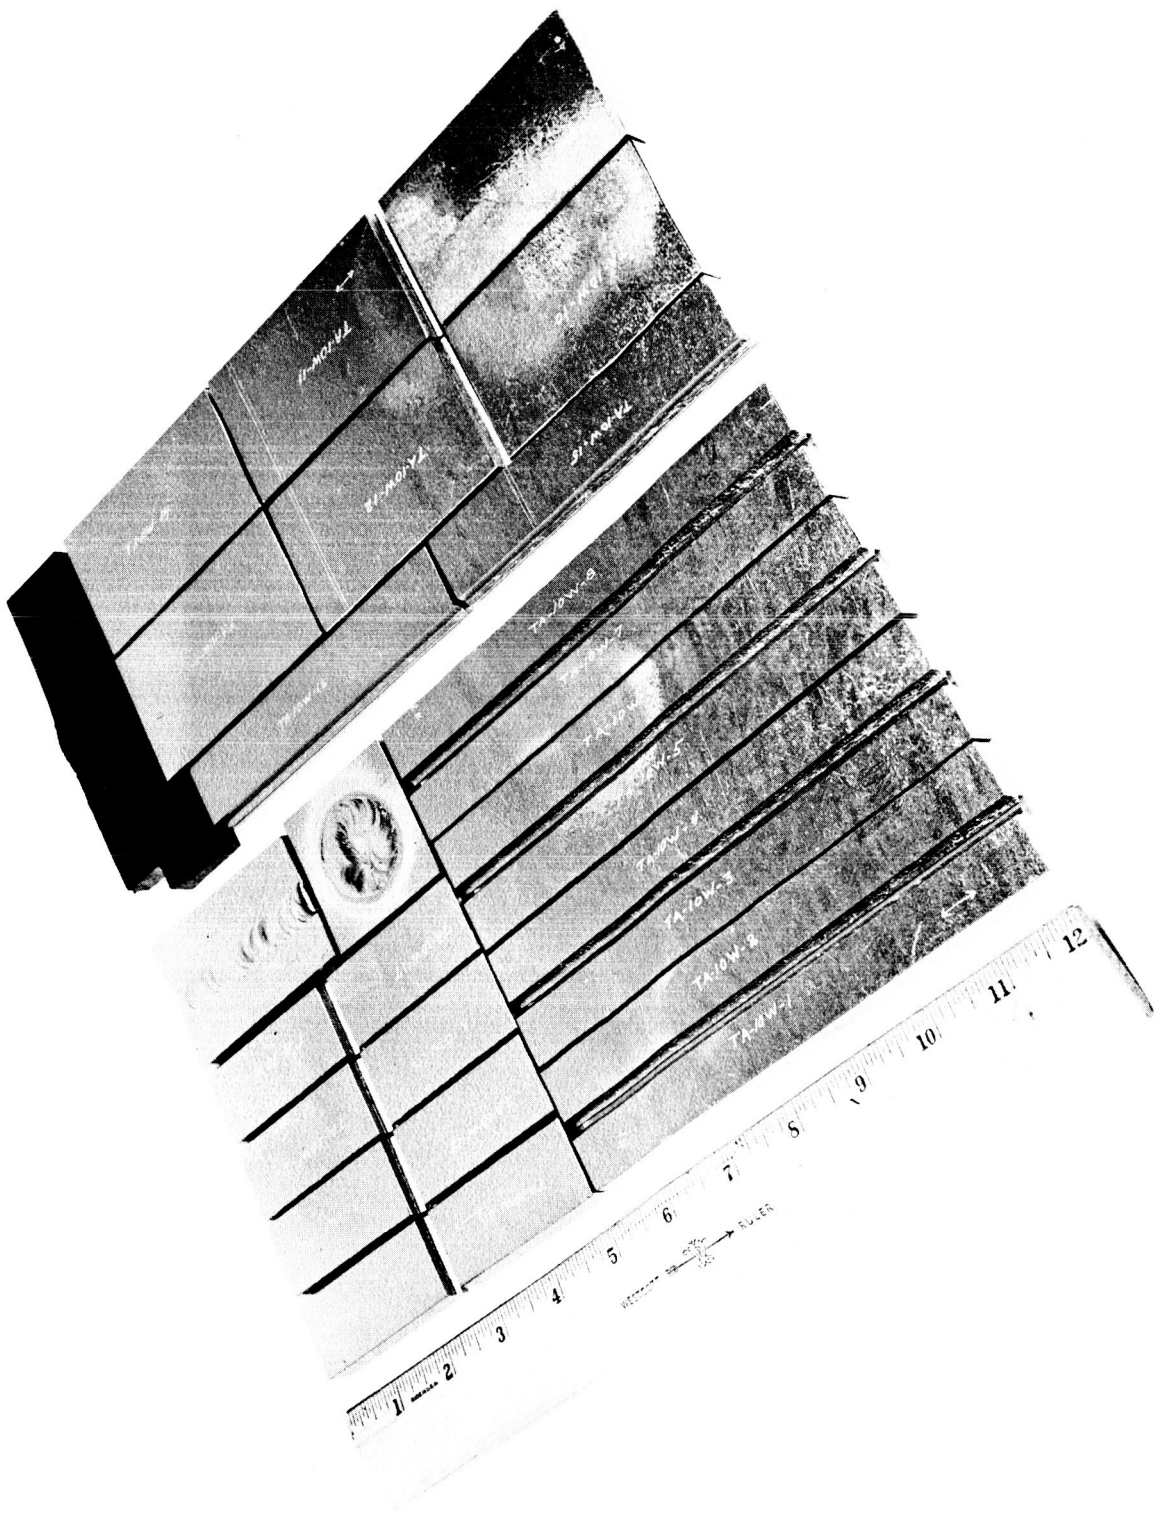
Ta-LOW Plate, Machined and Pickled in Preparation for Welding
